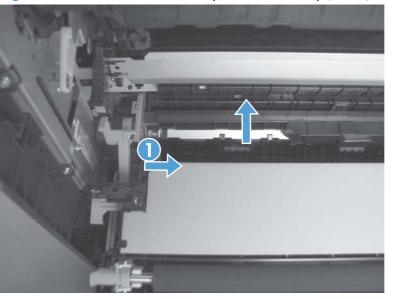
Remove the secondary transfer assembly (2 of 3)
